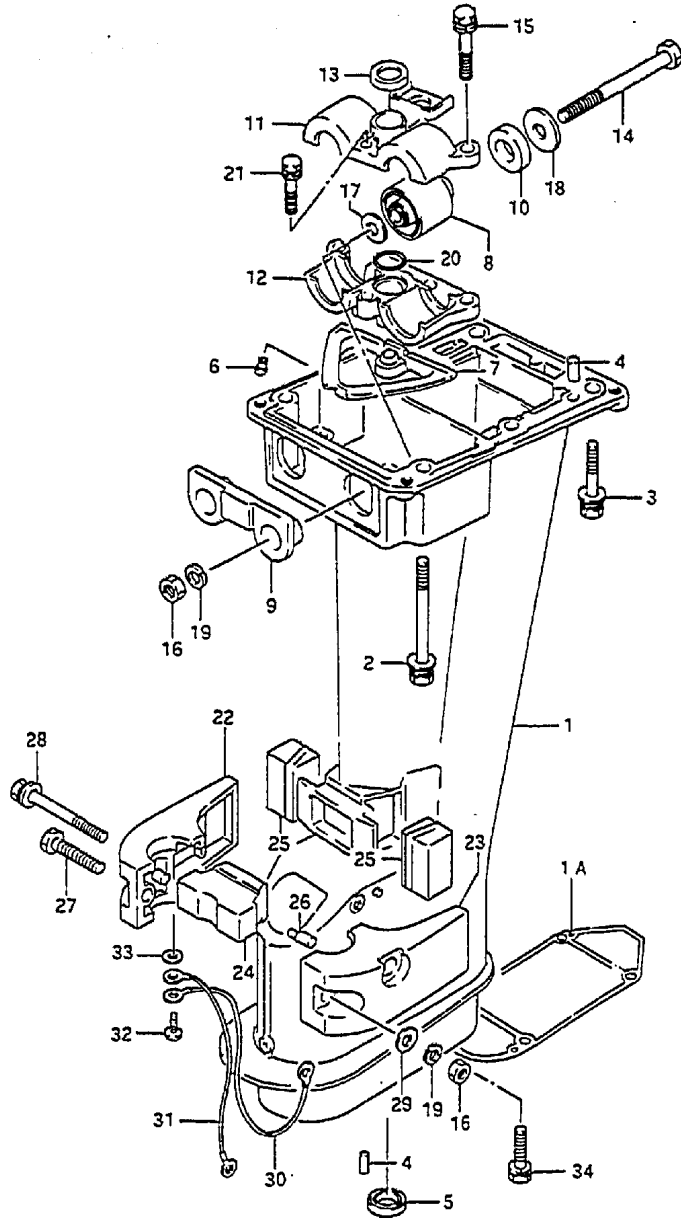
( D- 7) DRIVE SHAFT HOUSING
